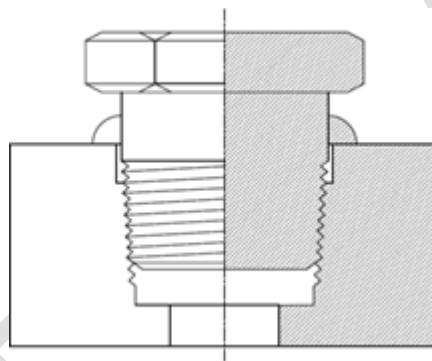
Seal Welded IOGP Welded NPT Threaded Plug Additional Tolerance Requirements
